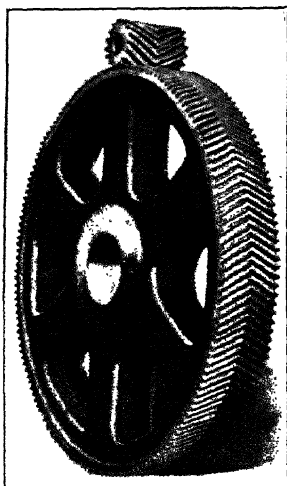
Continuous tooth herring-bone gear and pinion.
